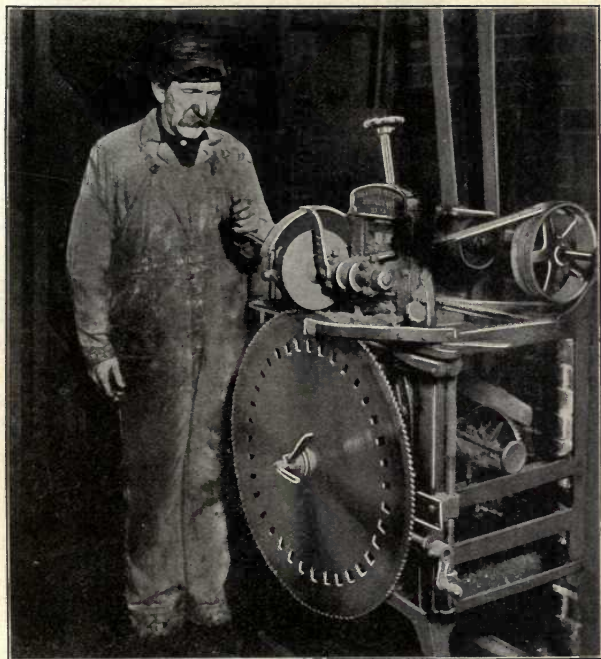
Sharpening a cold saw on a Matteson saw-sharpening machine.
